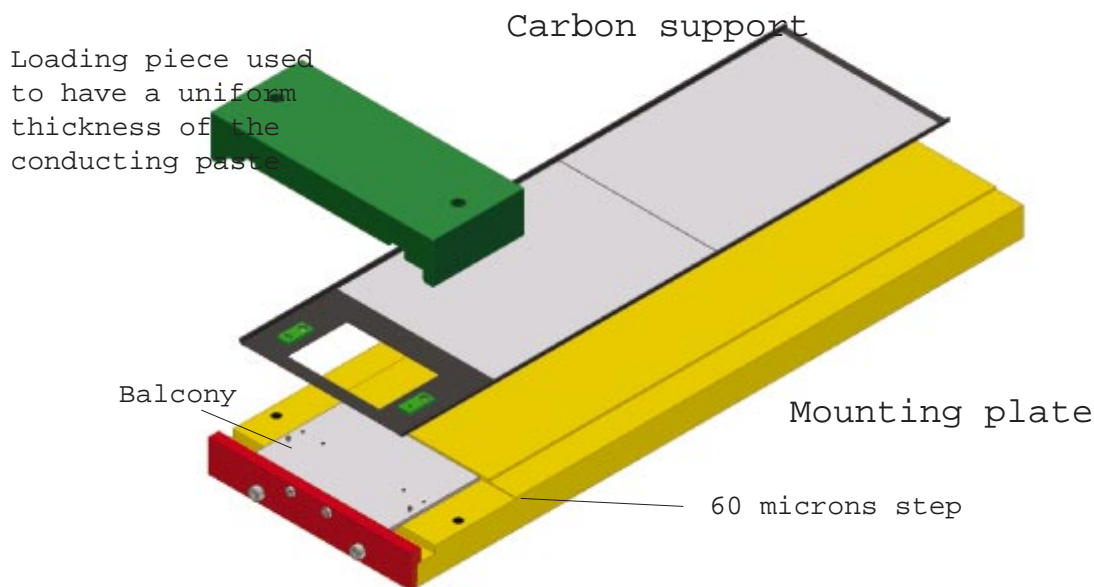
Drawing of the positioning of the Carbon support and the balcony.
